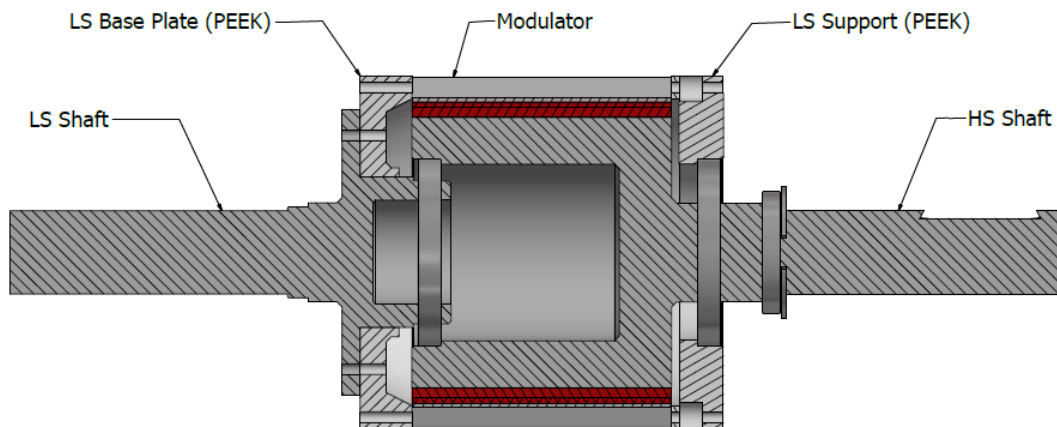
Sectional side view of the HS and LS shafts assembly
